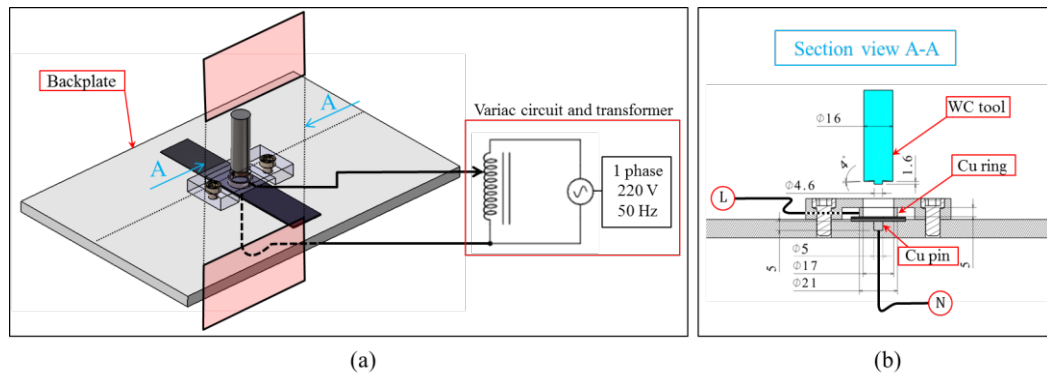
(a) Schema of the electrically-assisted equipment and (b) longitude section with dimensions (mm)
